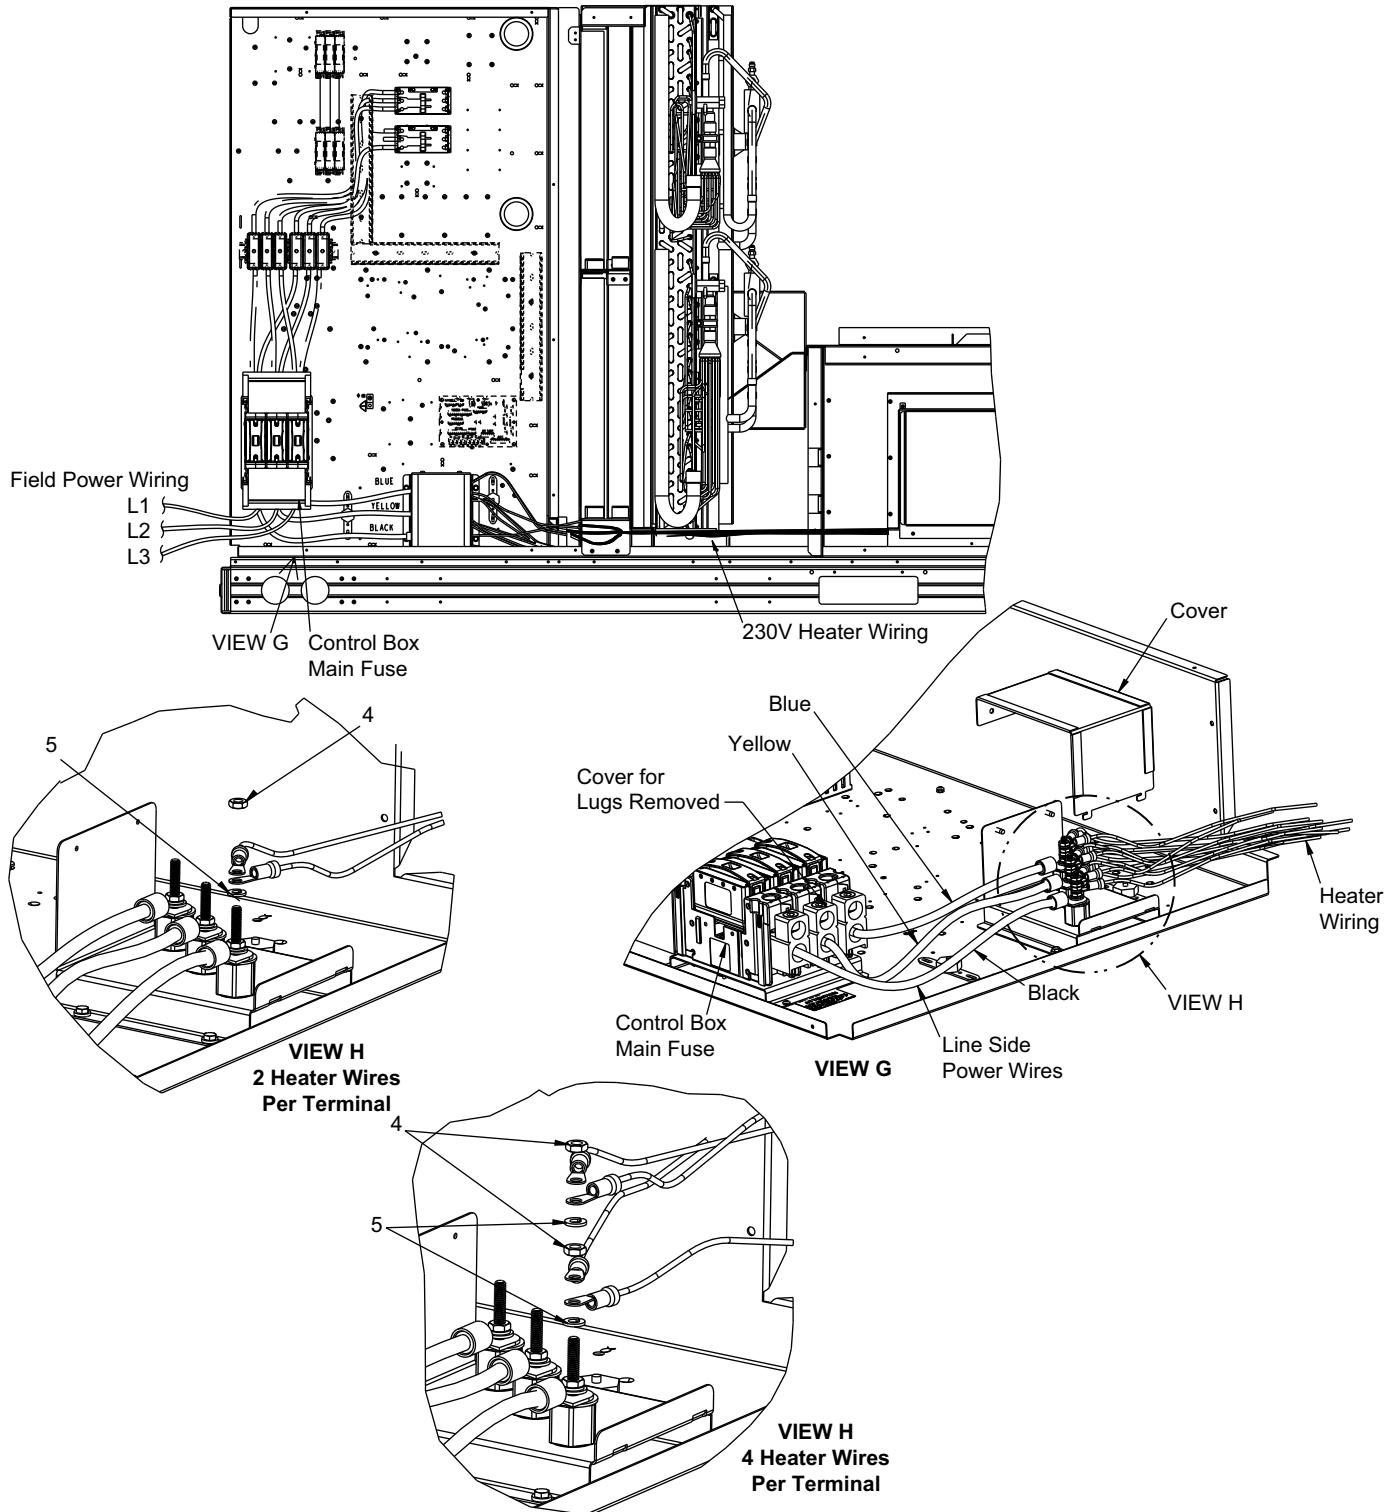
230V Single Point Power Assembly Location (High SCCR)
